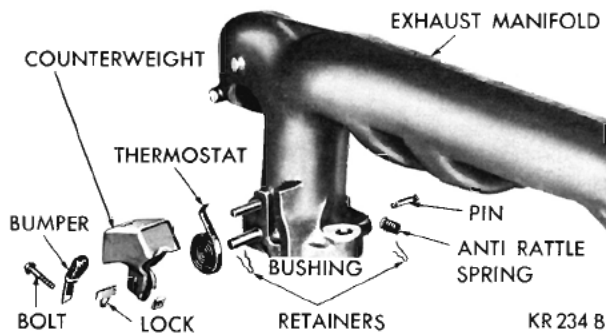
Manifold Heat Control Valve—Rear Outlet Manifold (361, 383 and 426 Cu. In. Engines)
